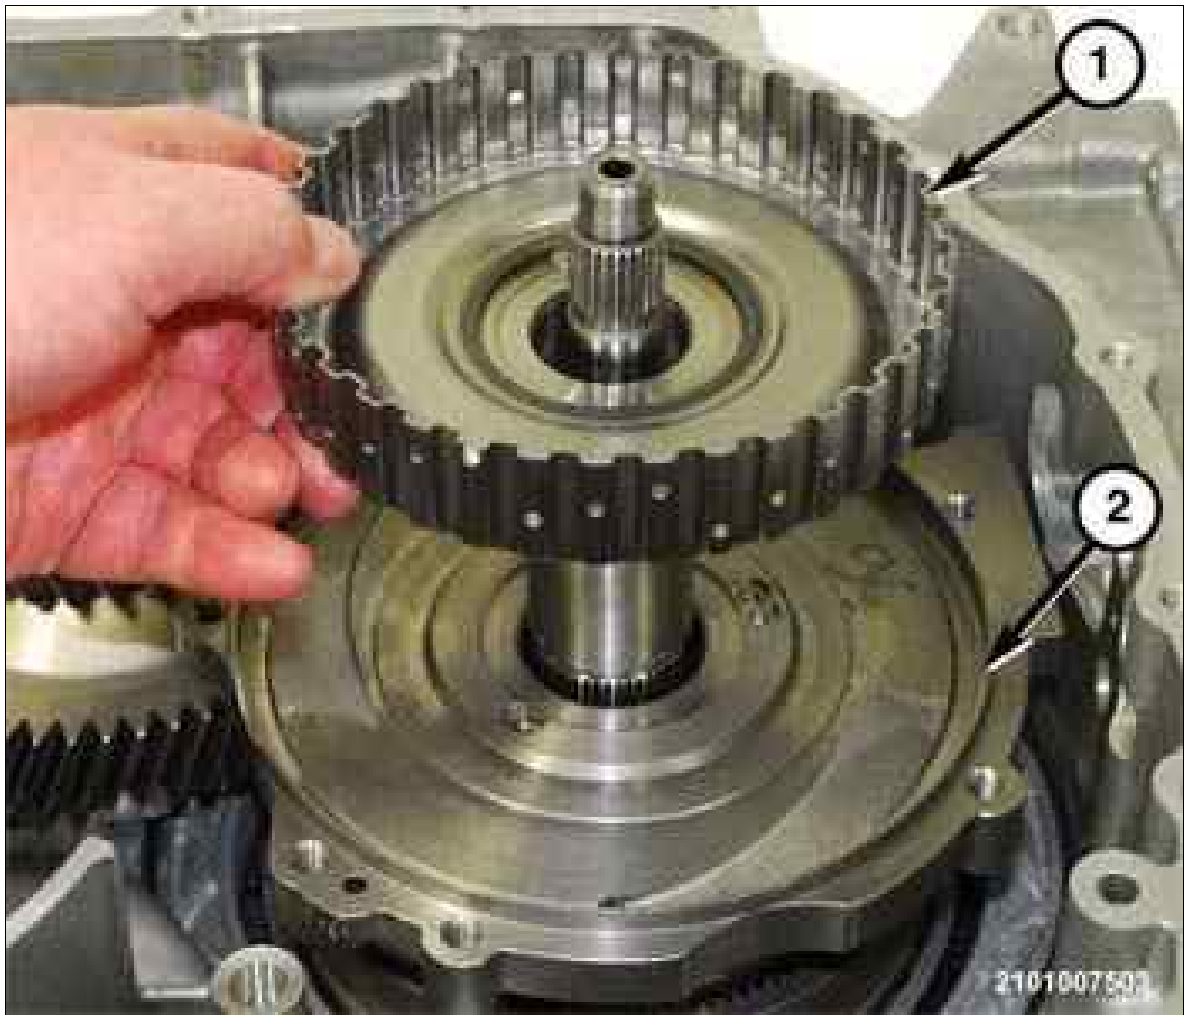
Removing/Installing Thrust Bearing At E-Clutch Assembly
